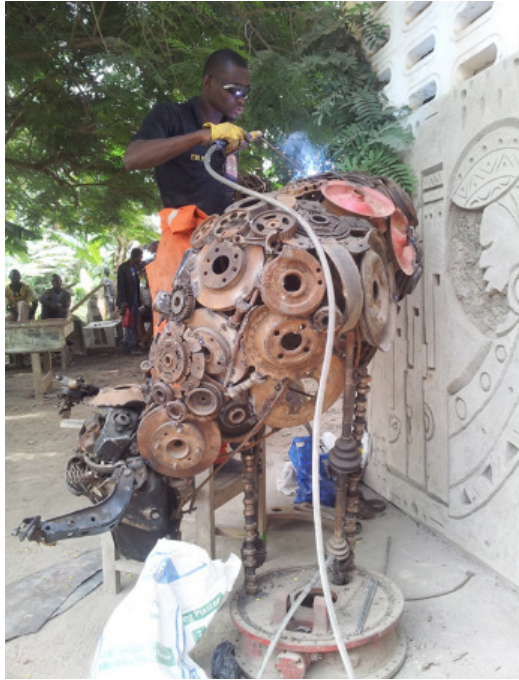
(C): Arc welding processes of scrap metals into composition
